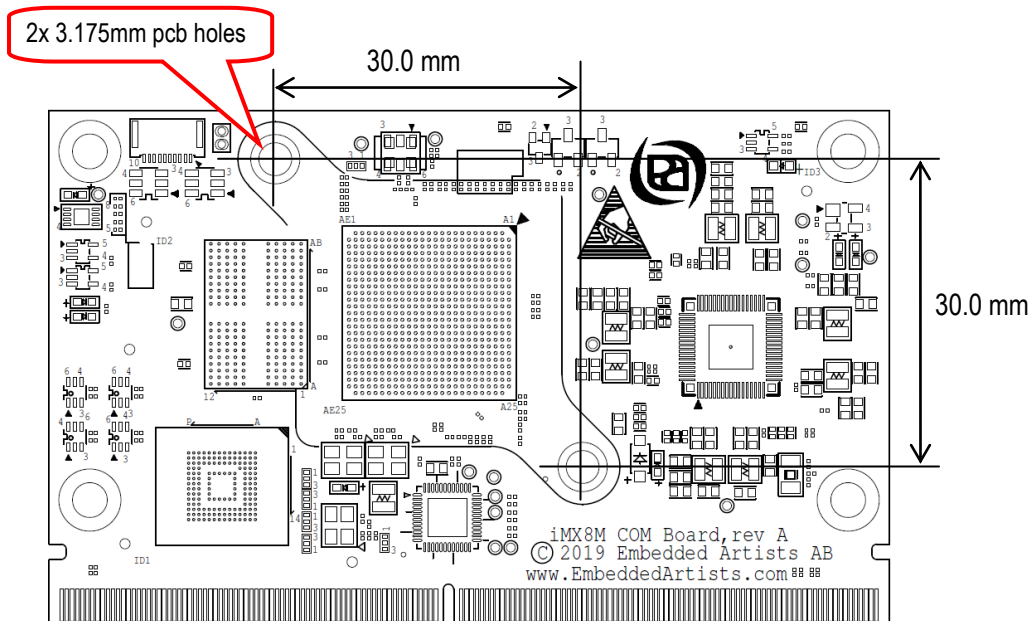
iMX8M COM Board and Heat Sink Mounting
